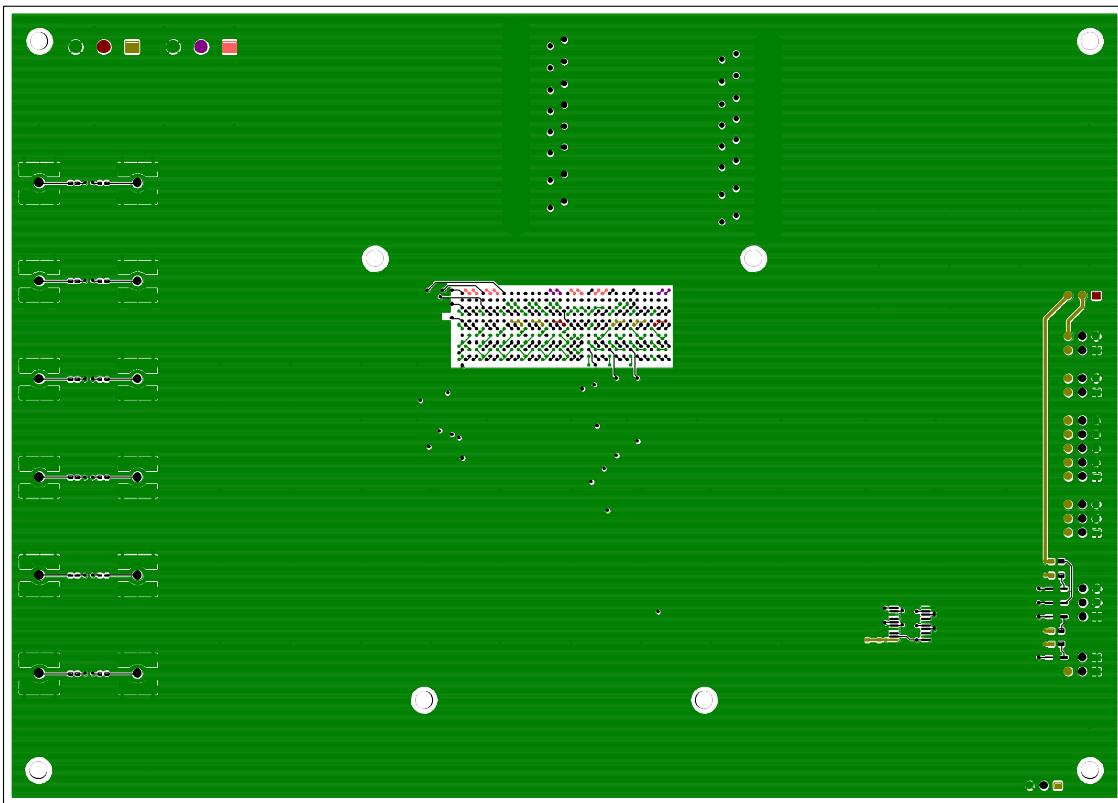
Layer 1—Component Side (Loopback Motherboard)
